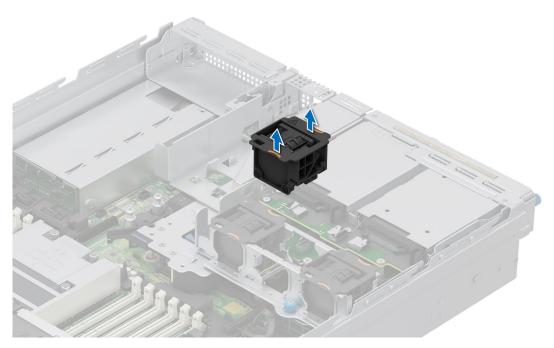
Removing a 4 x 2.5-inch rear drive module cooling fan
